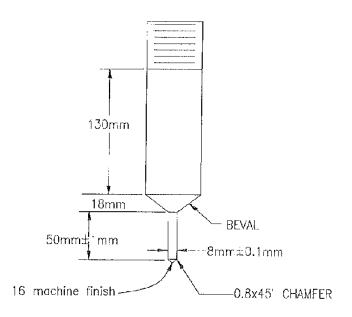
TEST PROBE DETAILS (NOT TO SCALE)
